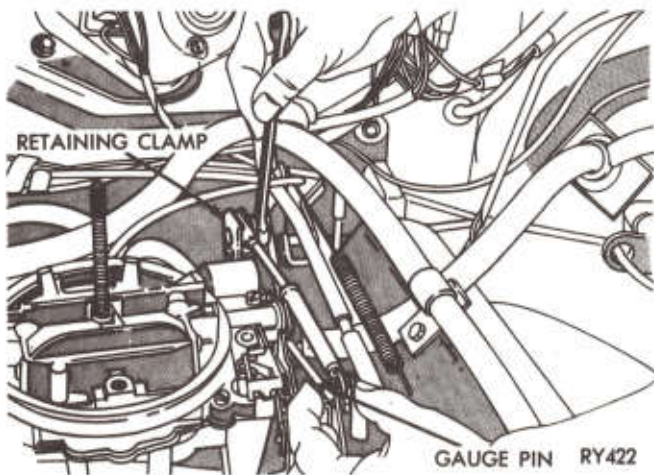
Servo Throttle Cable Adjustment (5.9L)
